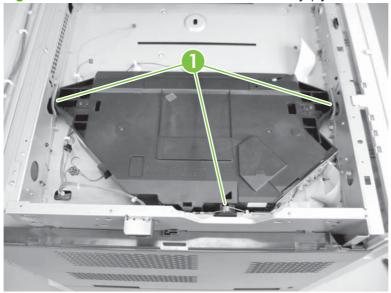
Remove the laser/scanner assembly (cyan and black) (2 of 3)
